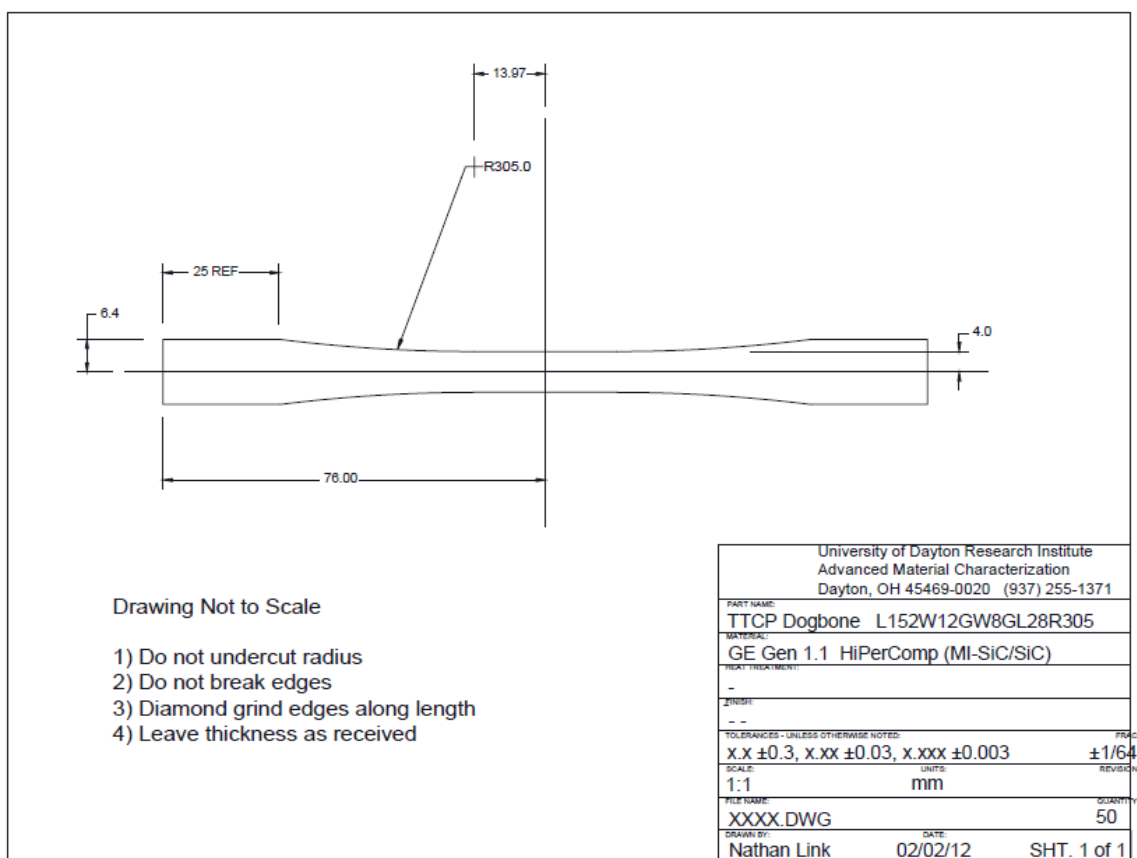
Drawing of the dogbone test specimen used for all tension, fatigue, and creep rupture tests
